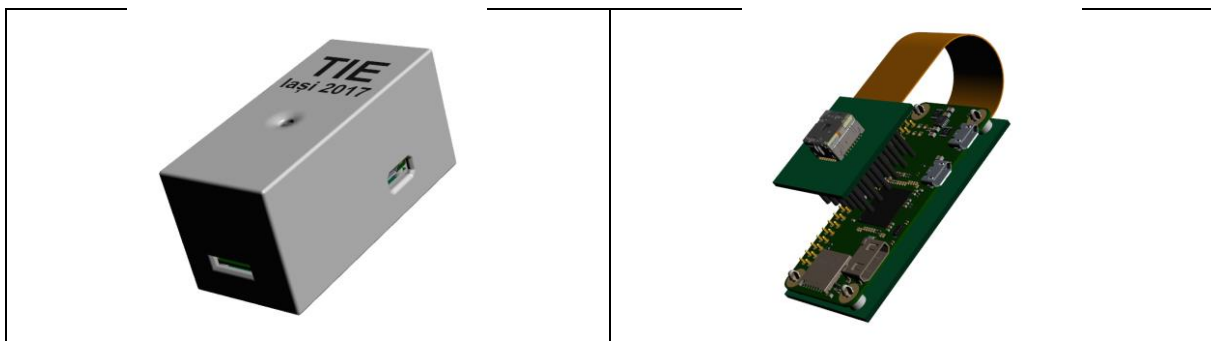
a). Mechanical housing of the module. b). How the PCB is slid into the housing.
